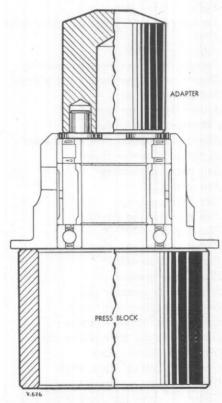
Press block T.77683 and adapter T.77686 for pressing out bearings and spacers.
